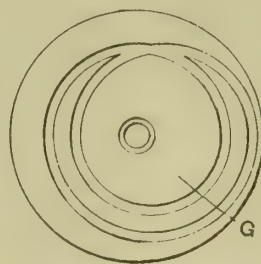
ROWAN'S VALVE MECHANISM FOR INTERNAL-COMBUSTION ENGINES.
